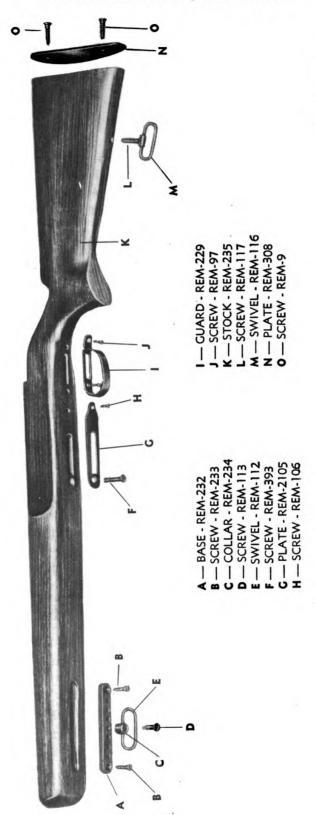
Stock Group of Remington Rifle, Cal. .22, Model 513T - Exploded View
